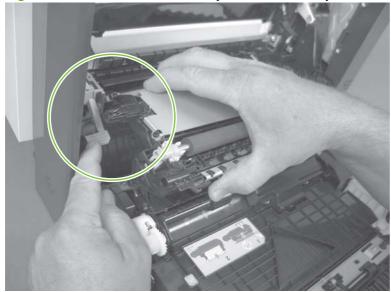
Remove the secondary transfer assembly (2 of 2)
